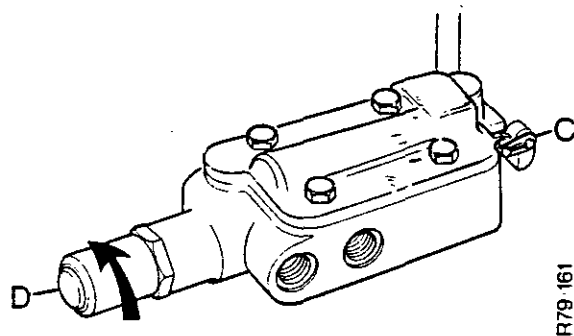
REMOVING THE THROW-OUT MECHANISM
